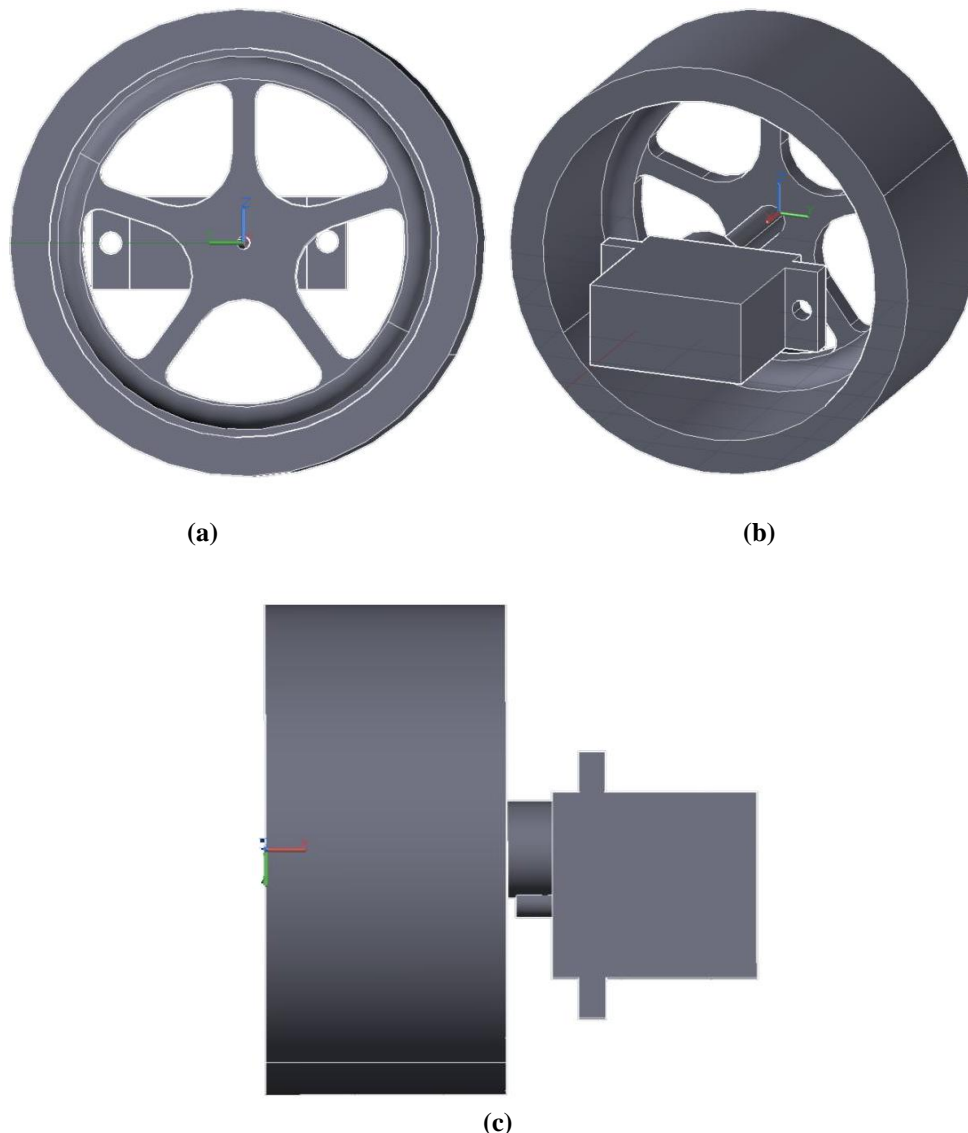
CAD Model of Servo motor Attached to Wheel; (a) Size View, (b) Isometric View, (c) Top View.
